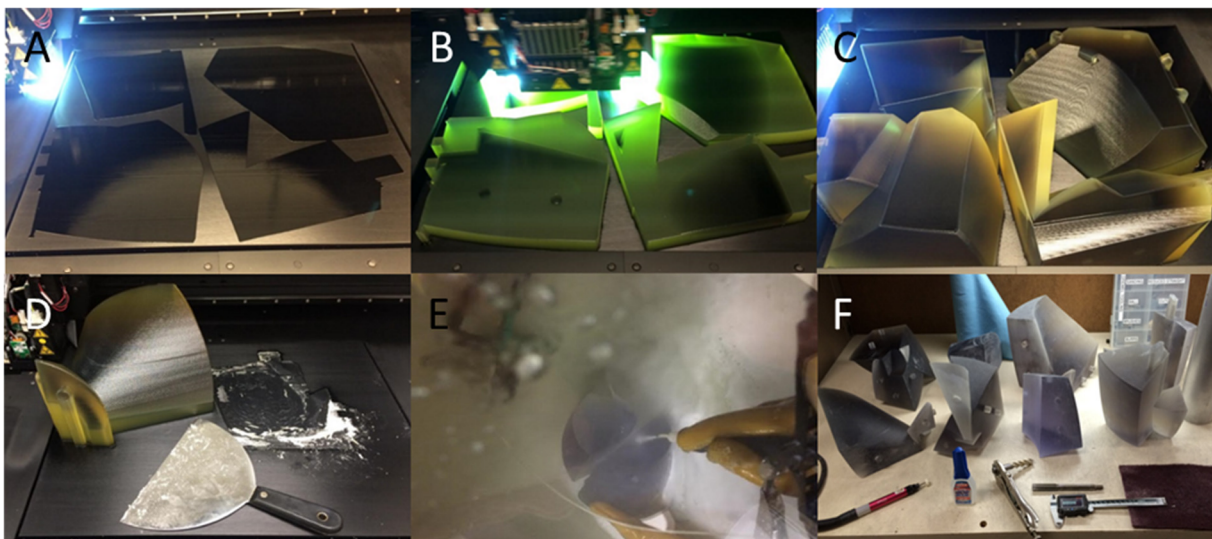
Printing the small FitzGerald and alternate design RSMs for the LaBr detector.
